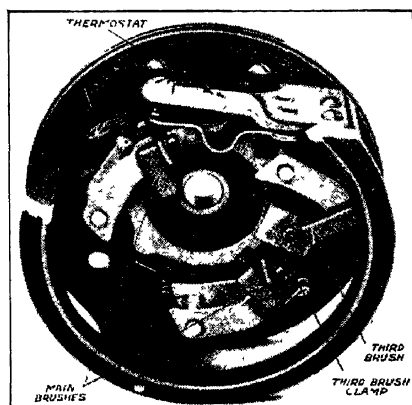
Commutator end housing for Remy generator showing brushes and thermostat.
